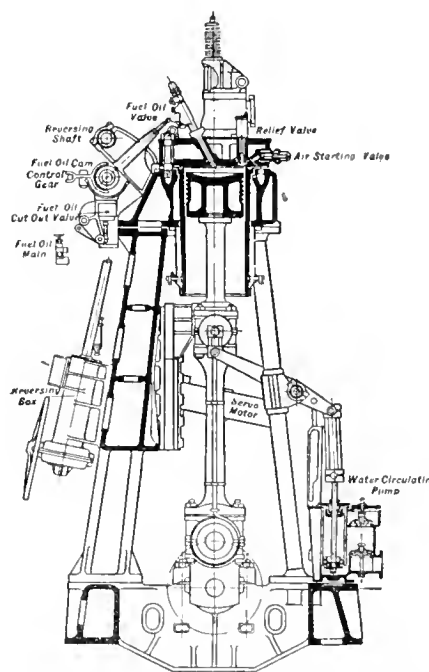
CYLINDER CONSTRUCTION AND REVERSING ARRANGEMENT OF TREFOIL TYPE VICKERS DIESEL ENGINE
